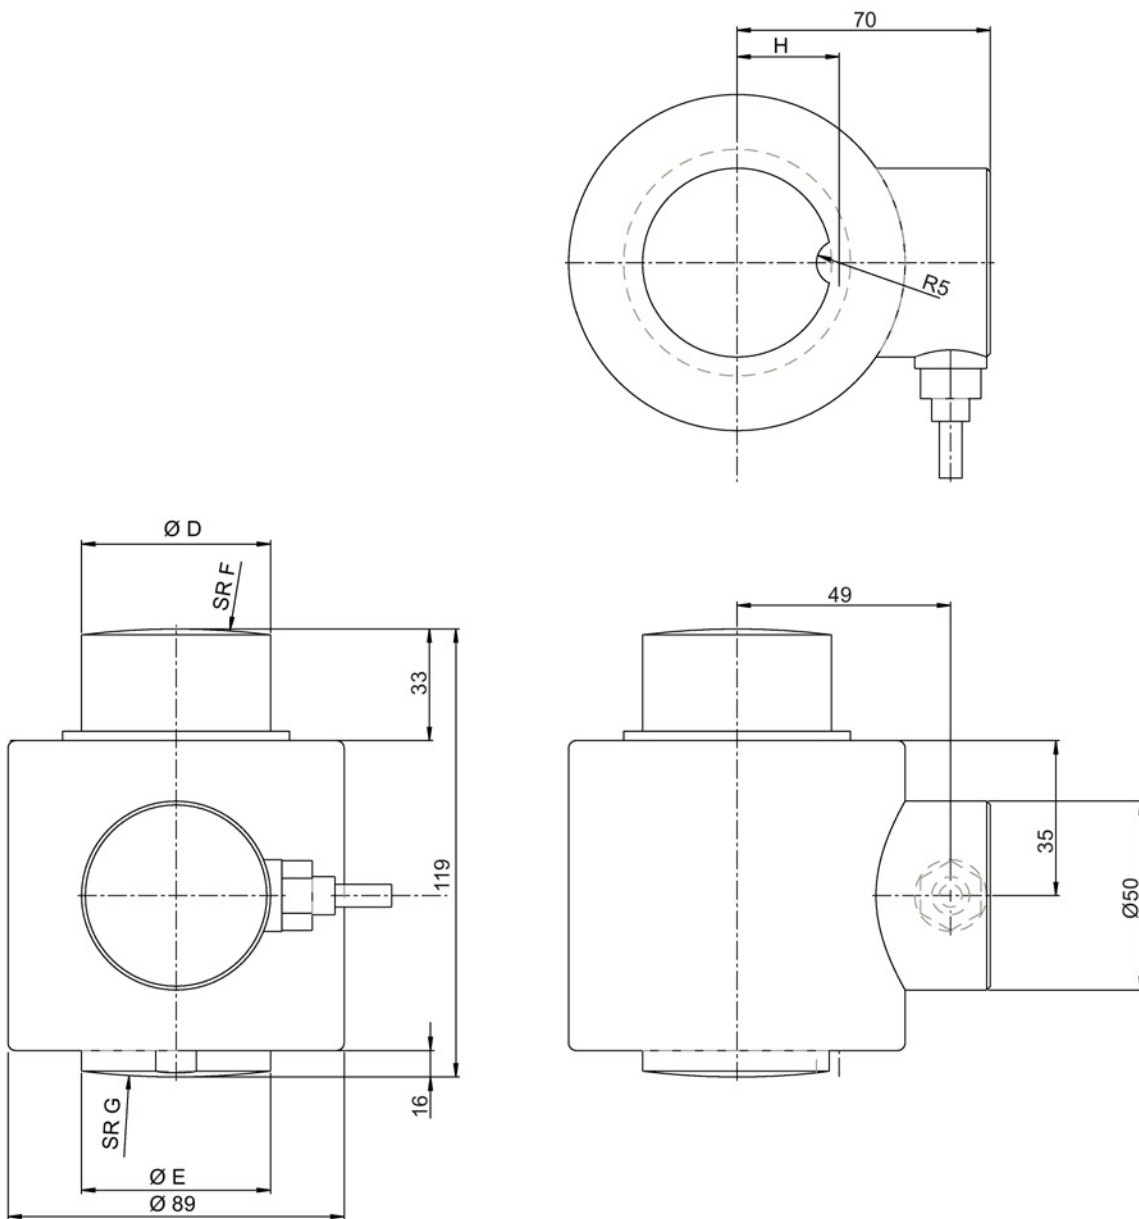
SIWAREX WL270 CP-S SA dimension drawing
